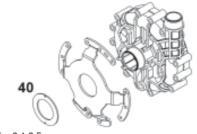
F – Disassembly of the protection flange for the threaded execution
